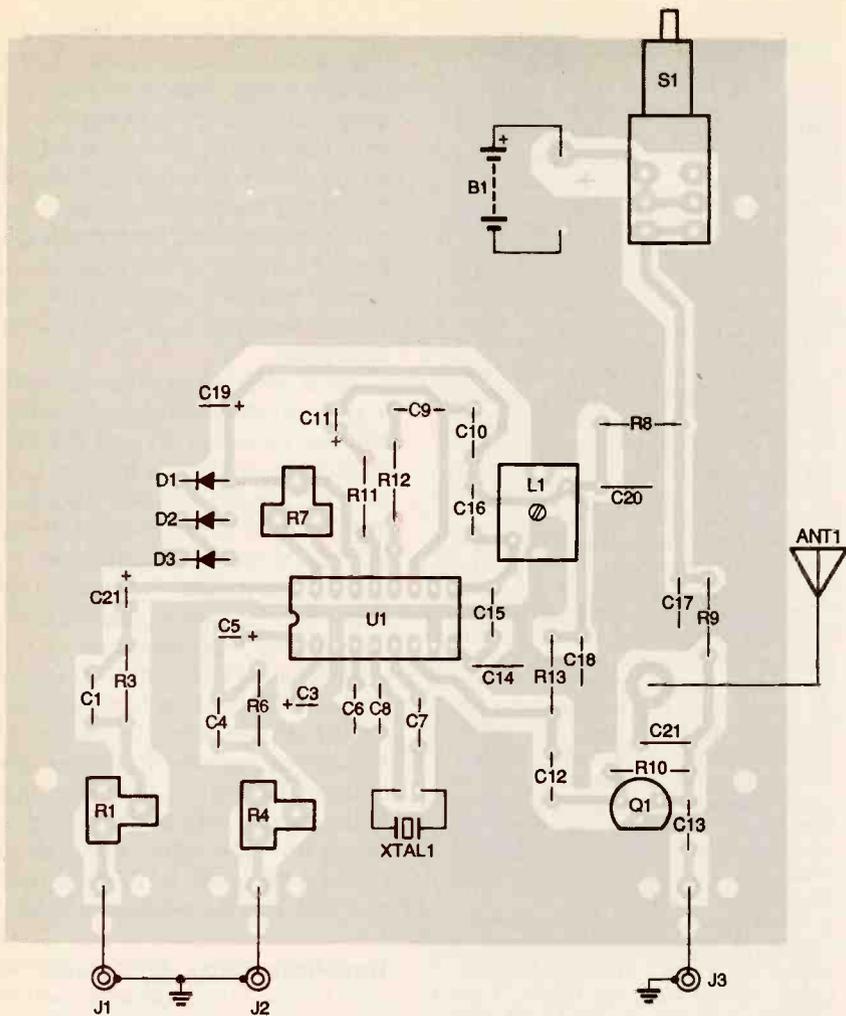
Use this parts-placement diagram as a guide when mounting components on the board. Before soldering the polarized components, check to make sure their orientations match the ones shown here.
